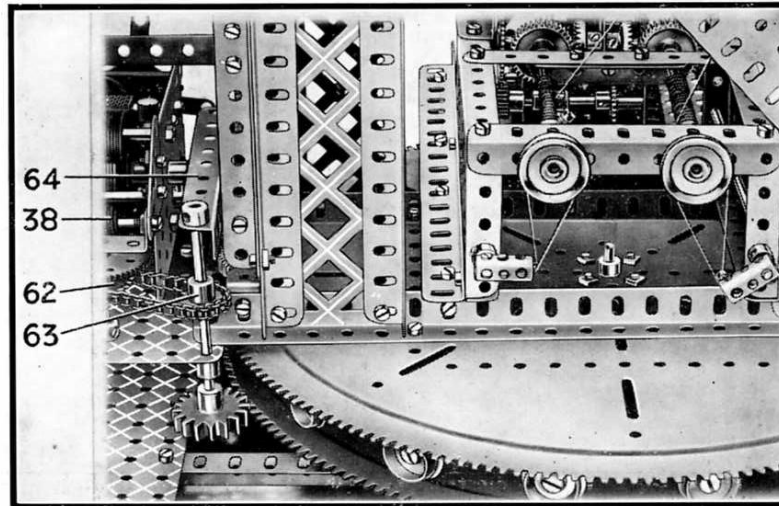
The fitting of the hoisting drum brakes is clearly shown in this view
